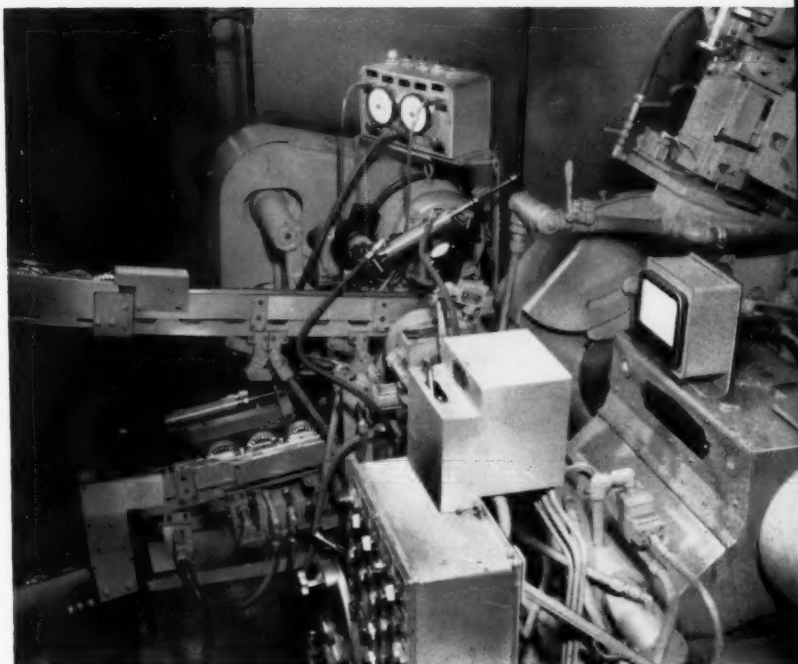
Outer peripheries of gears are finished on this cylindrical grinder. Turret type work-holder can be seen in heading illustration.
